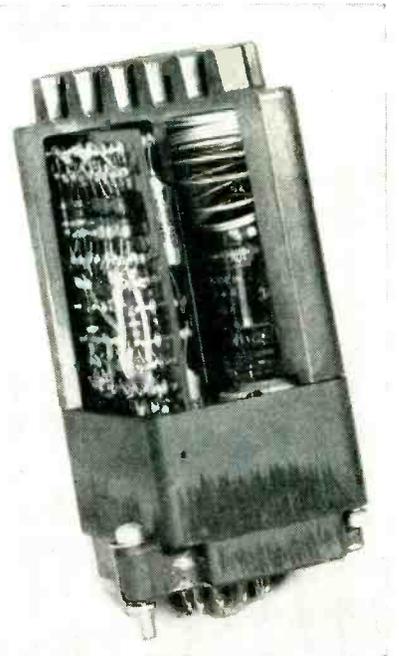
Navy Electronics Laboratory packaged replacement unit with section cut away to show placement of components
